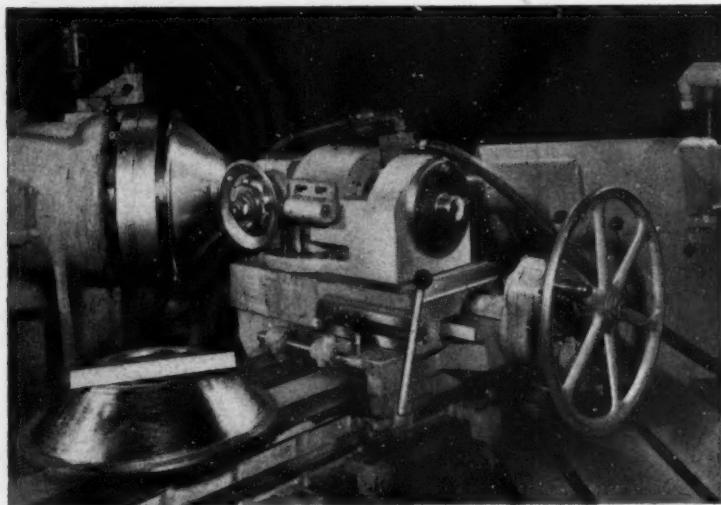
Intermediate Bearing Supports are Power Roll-formed from AMS 6322 Alloy Steel Forgings on this Floturn Lathe. A Saving of \$18 on Each Component is Obtained
